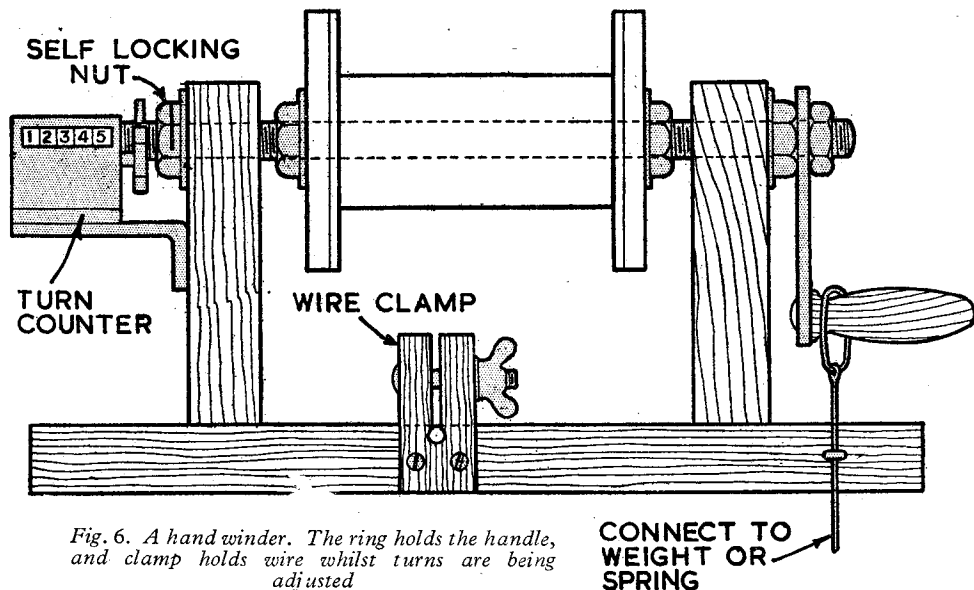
A hand winder. The ring holds the handle, and clamp holds wire whilst turns are being adjusted
